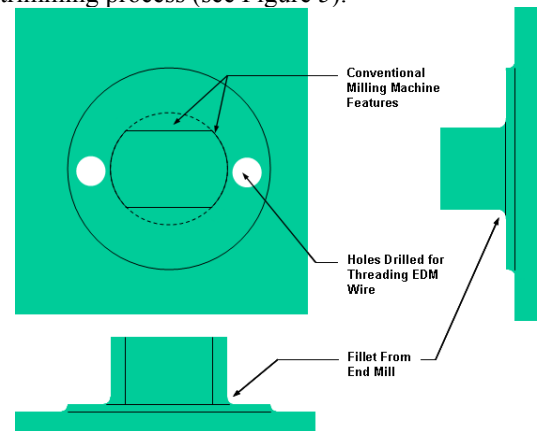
First Step: Create Preliminary Features Using a Milling Machine
